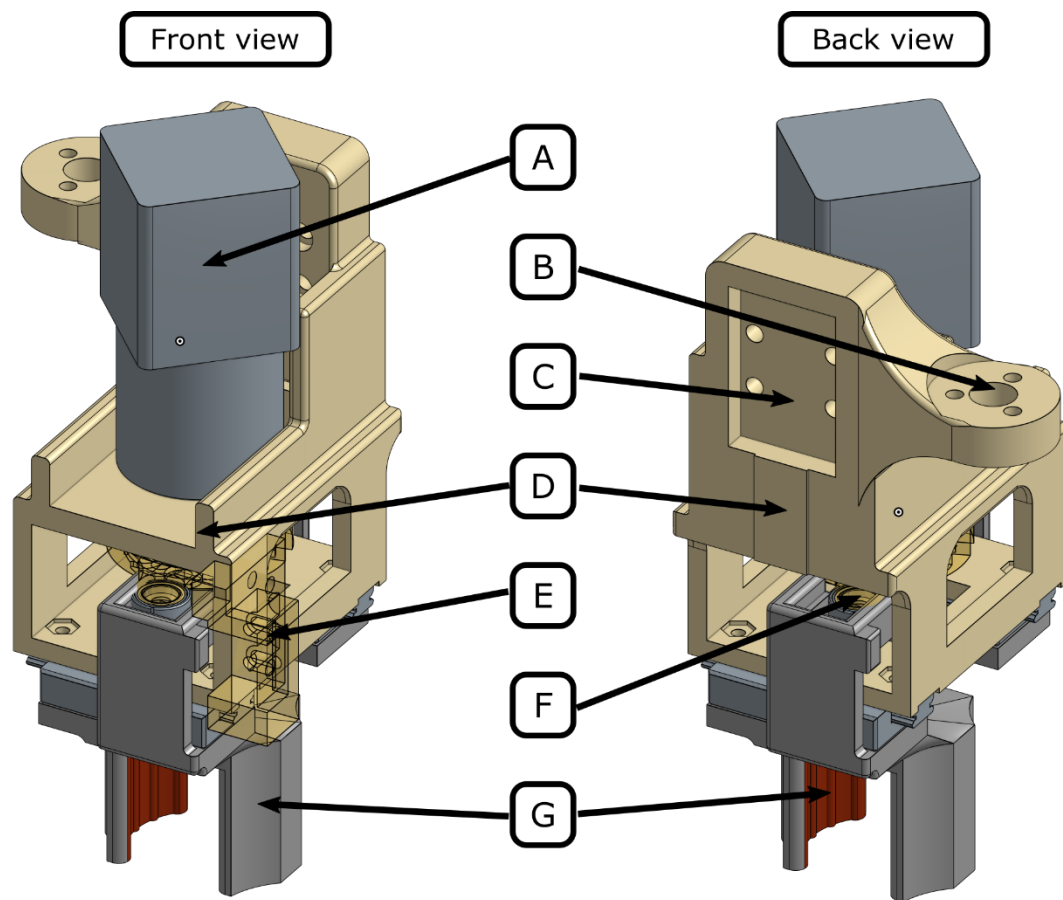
X-axis assembly. (A) Nema14 250 mm lead screw motor (B) Cable chain mount (C) NSK PIU090600SKN-PCT 9 mm linear rail (D) 3D printed mounting plate with two embedded NSK PAU09TRS linear guide carriages (E) 3D printed endstop mount.
